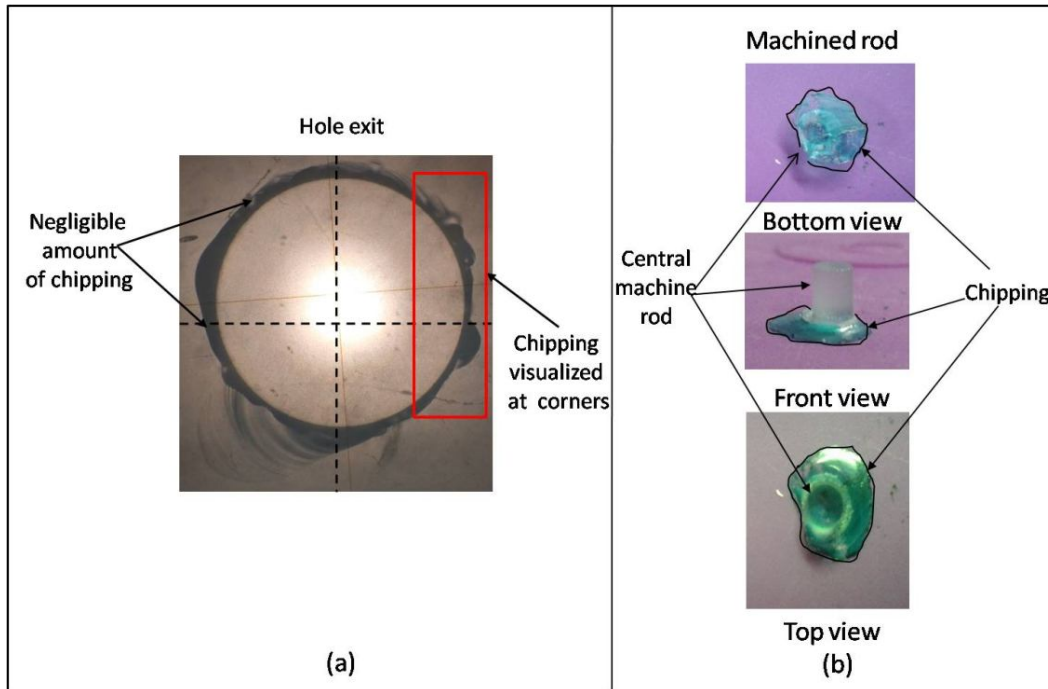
Hole back side view (a) Hole Exit chipping (b) Different views of Machined rod
